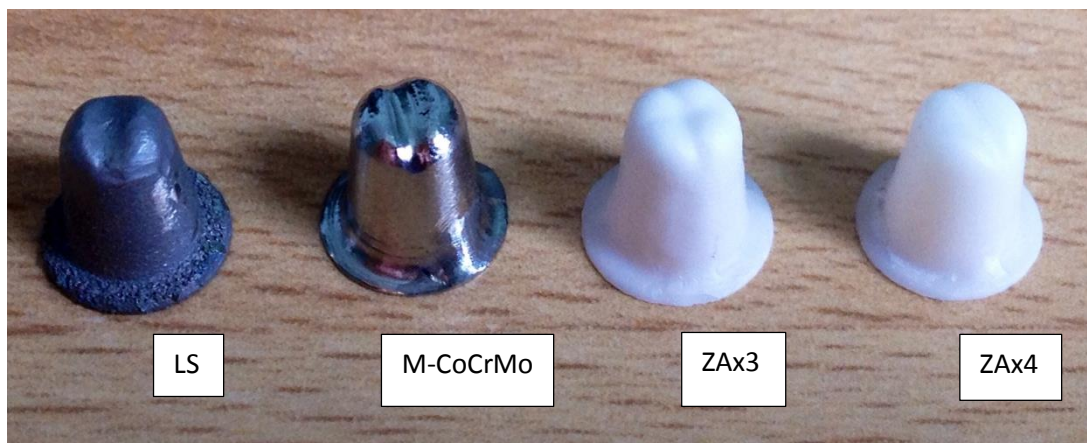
Fabricated copings using different techniques of CAM using the same CAD [Laser Sintered CoCrMo coping (LS), 5-Axis Milled Cobalt Chrome Molybdenum coping (M-CoCrMo), 3-Axis Milled Zirconia coping (ZAx3), 4-Axis Milled Zirconia coping (ZAx4)]
